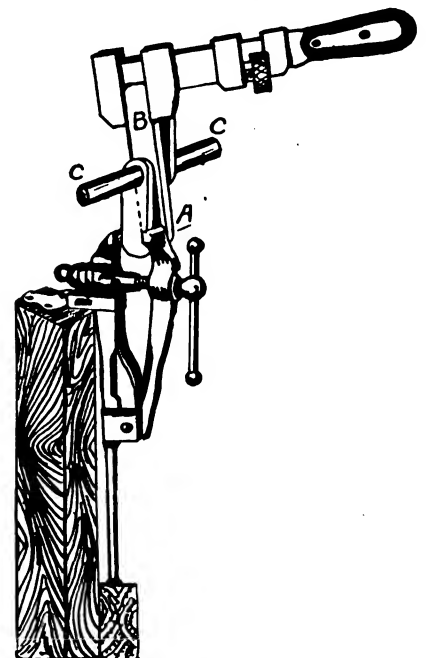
HOW TO STRAIGHTEN A BENT CRANK SHAFT
